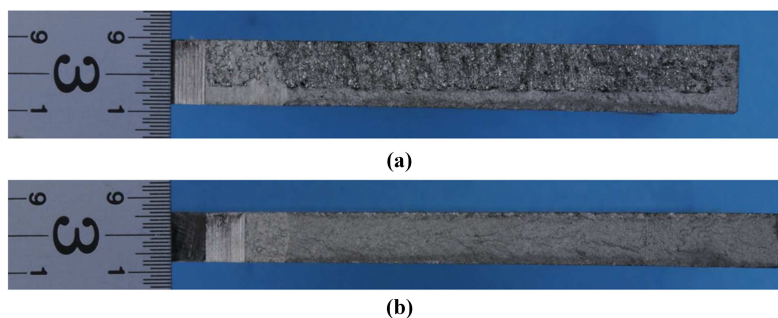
Fracture surfaces for crack propagation parallel to the build direction (b) or perpendicular (a) [50]
